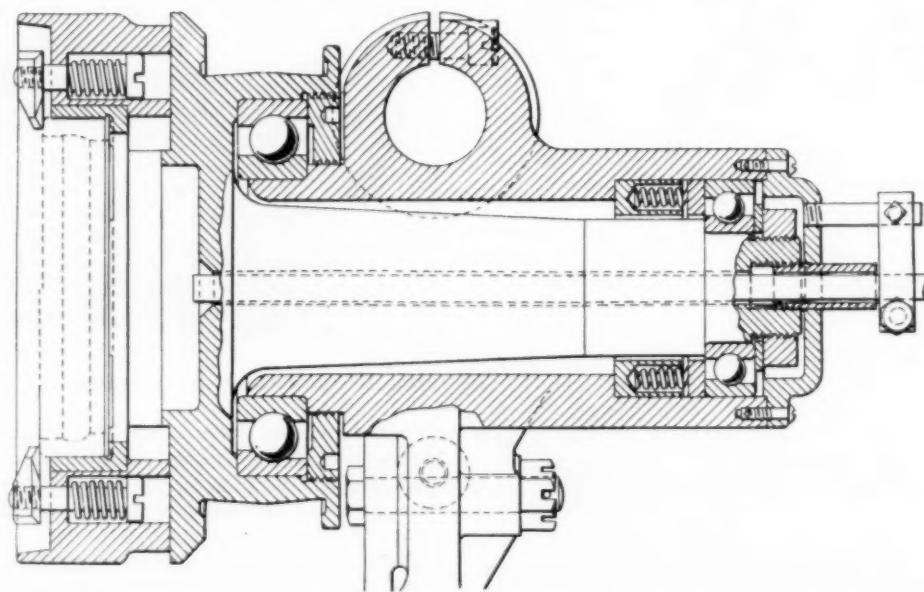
CHUCK SPINDLE OR WORK HEAD OF GRINDER SHOWN IN FIG. 5. SPRING ADJUSTED
